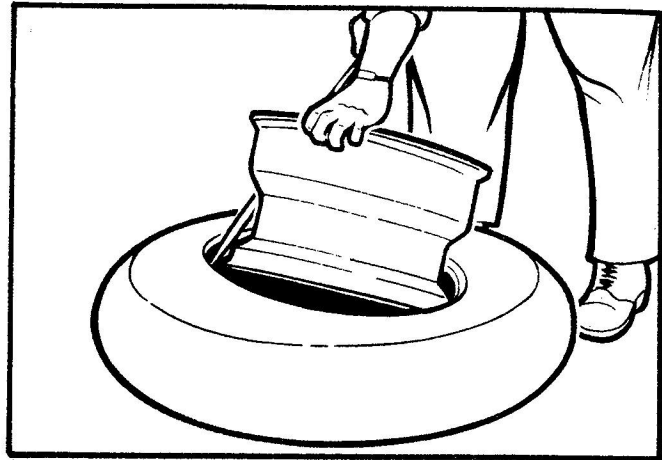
Placing Flange of Wheel Under Tire Bead to Start Mounting Operation
